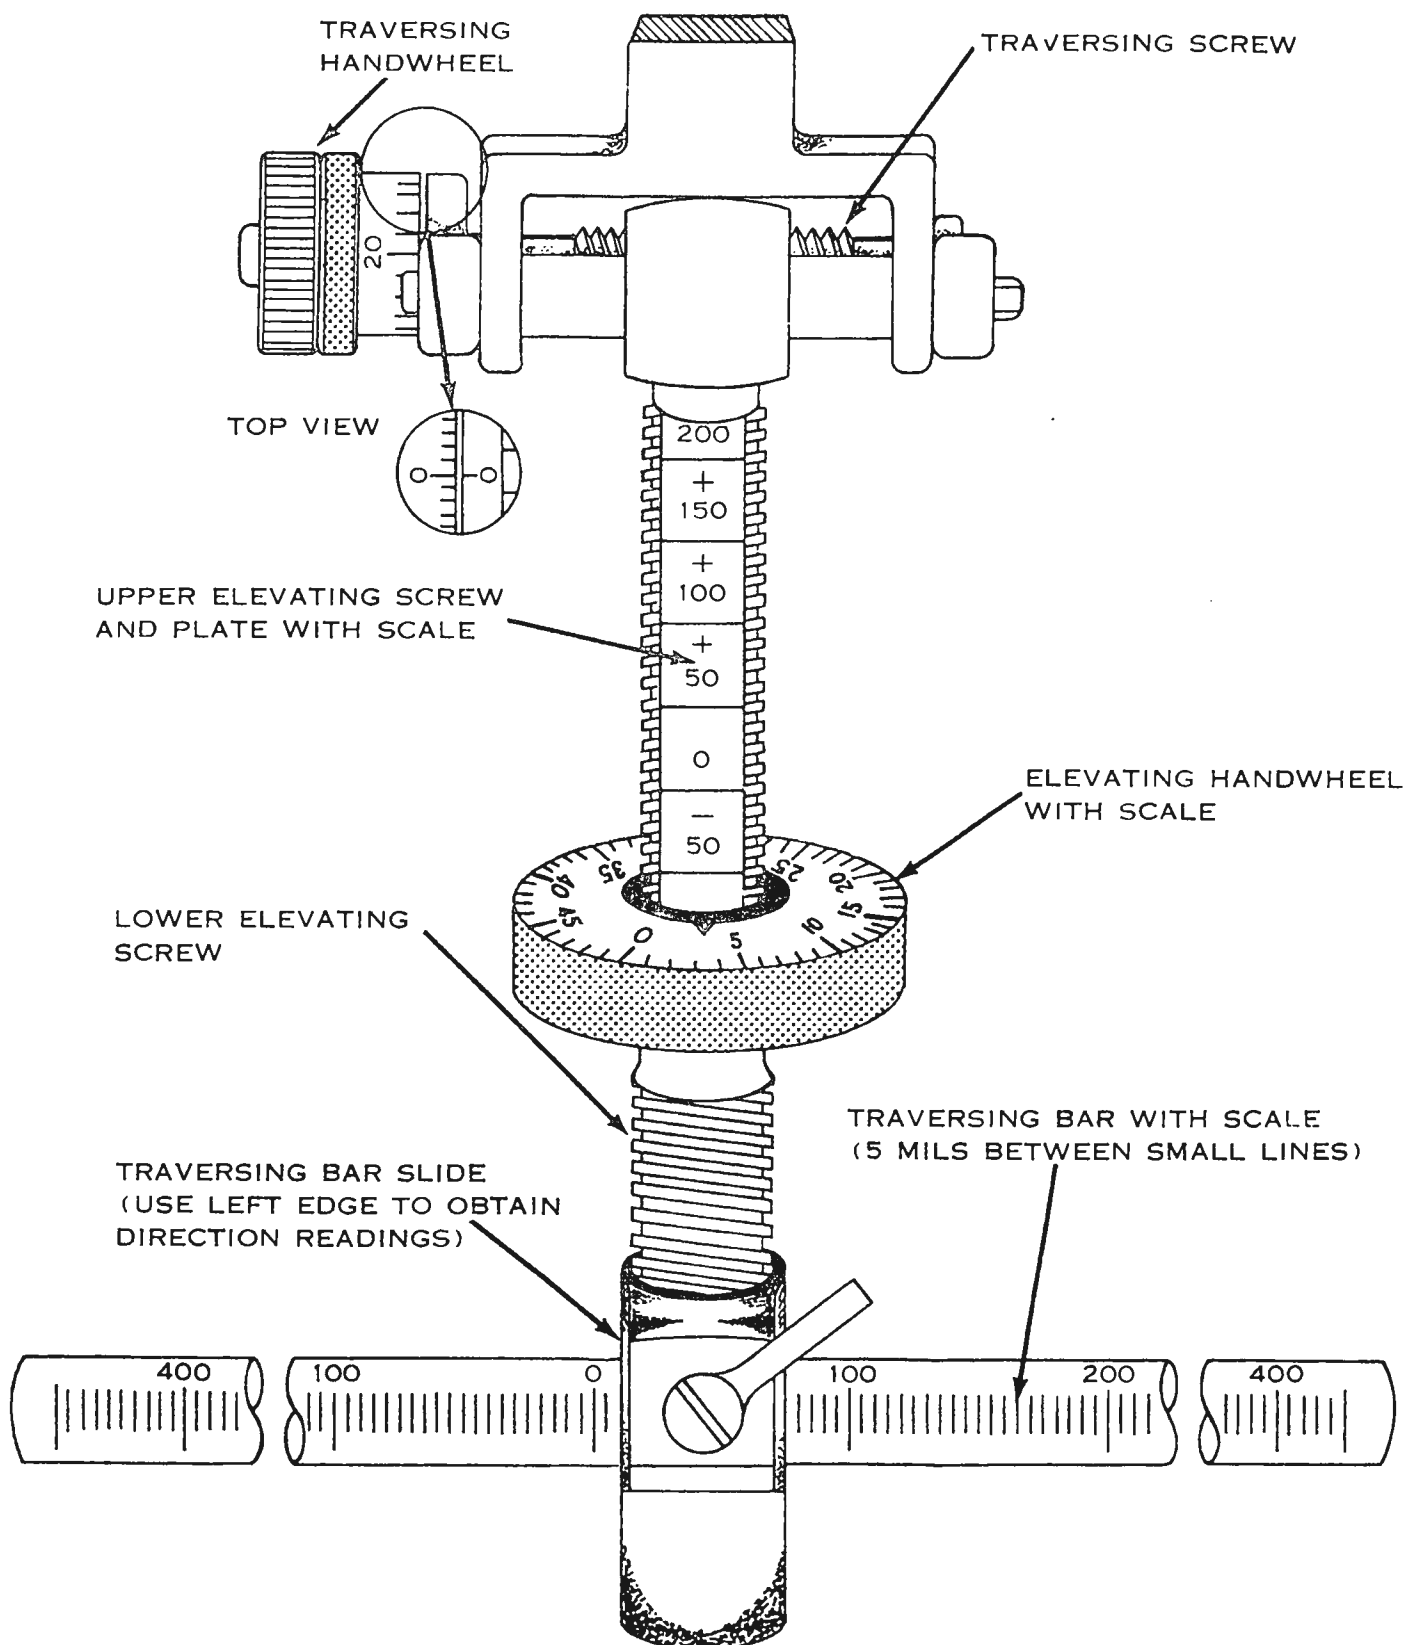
TRAVERSING BAR AND TRAVERSING AND ELEVATING MECHANISM
